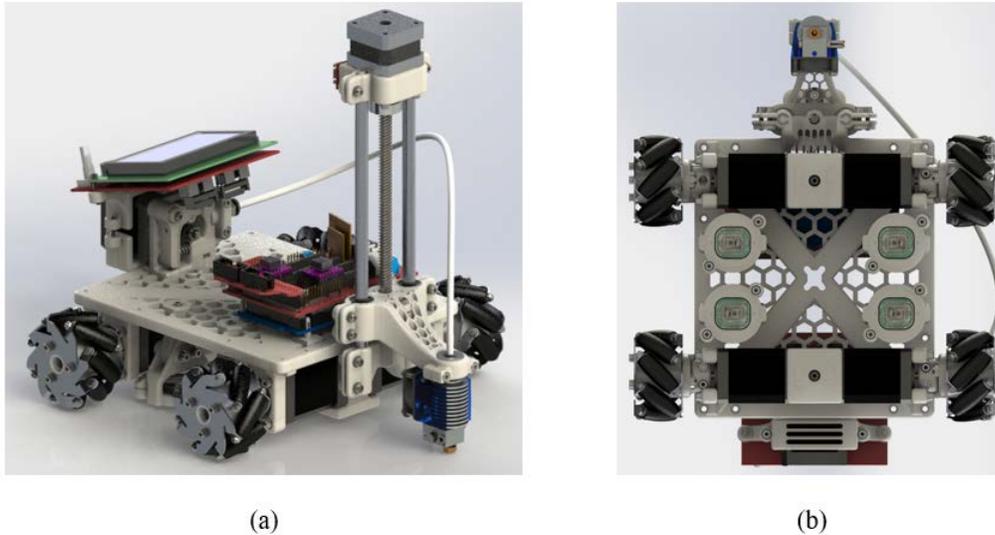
A mobile 3D printer: (a) isometric view; (b) bottom view.
